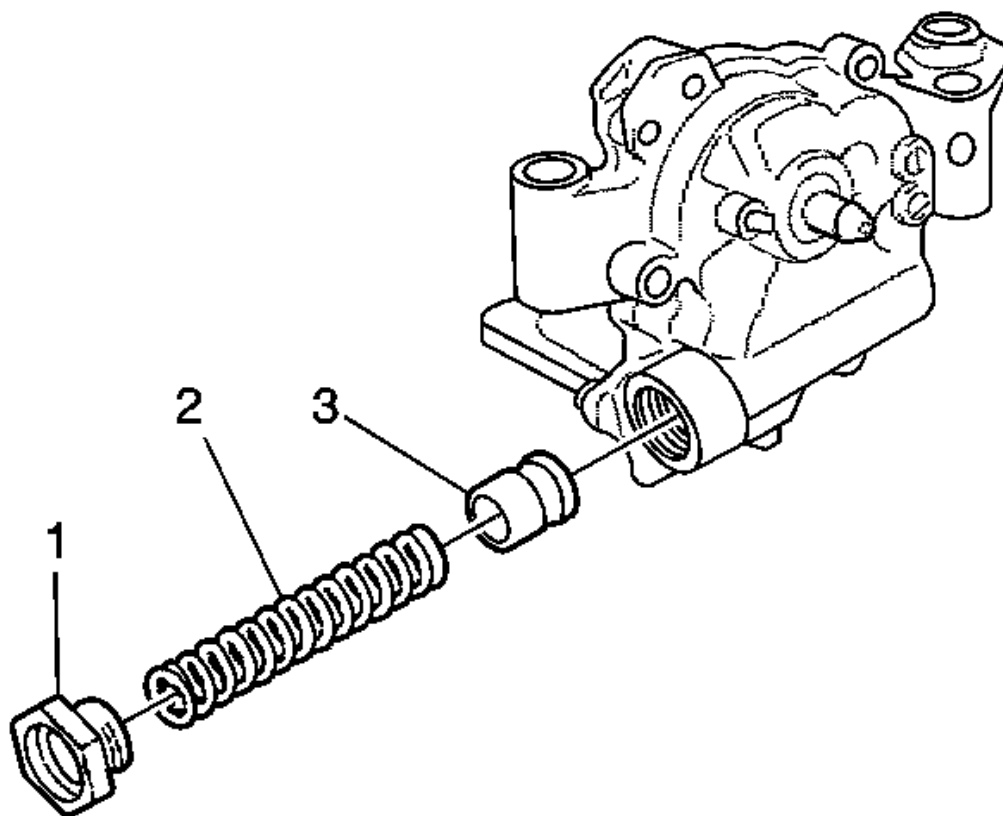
View Of Oil Pump Valve Spring & Relief Valve
